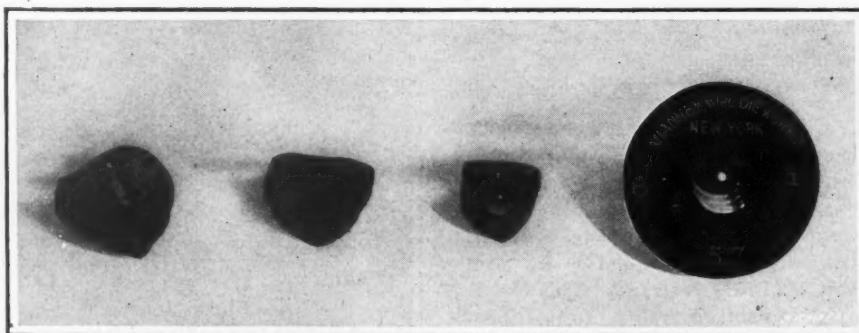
Rough Diamond, Flattened Stone, Drilled Stone and Diamond Die mounted Ready for Use in drawing Wire
